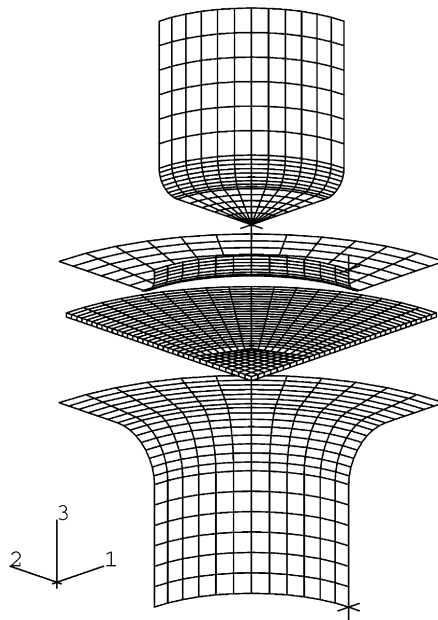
Exploded view of the FE mesh used in the cup drawing simulations.
